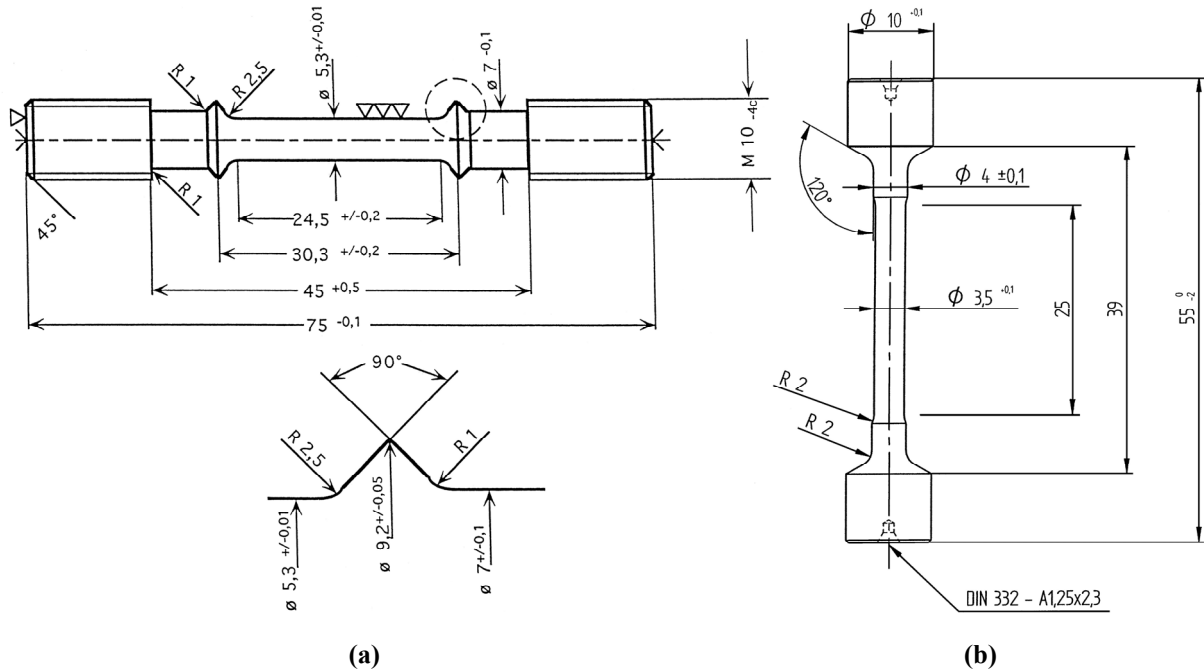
Final geometry of machined specimens. (a) Tensile creep specimen. (b) Tensile specimen. Dimensions are in millimetres.
